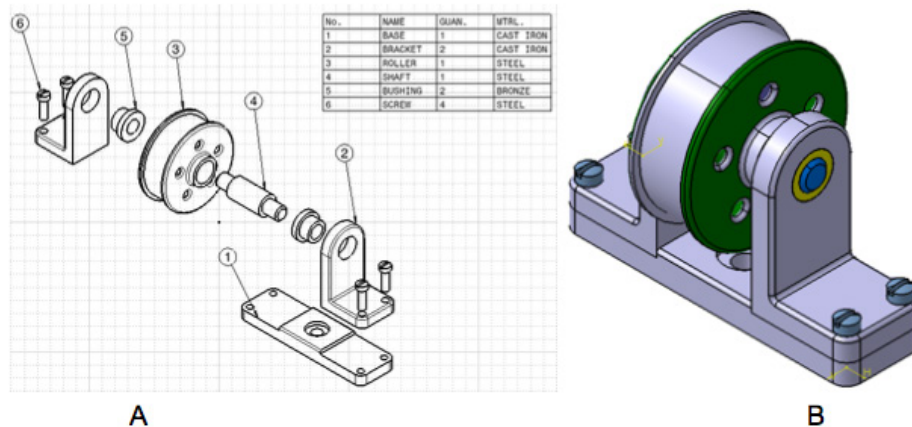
A: Exploded view of a roller guide, B: 3-D view of a roller guide.
